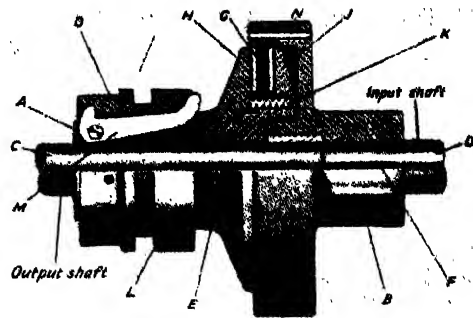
FRICTION CLUTCH. Single-disk friction clutch, generally used for machine tools of all types. The lettering is explained in the text in this page.
